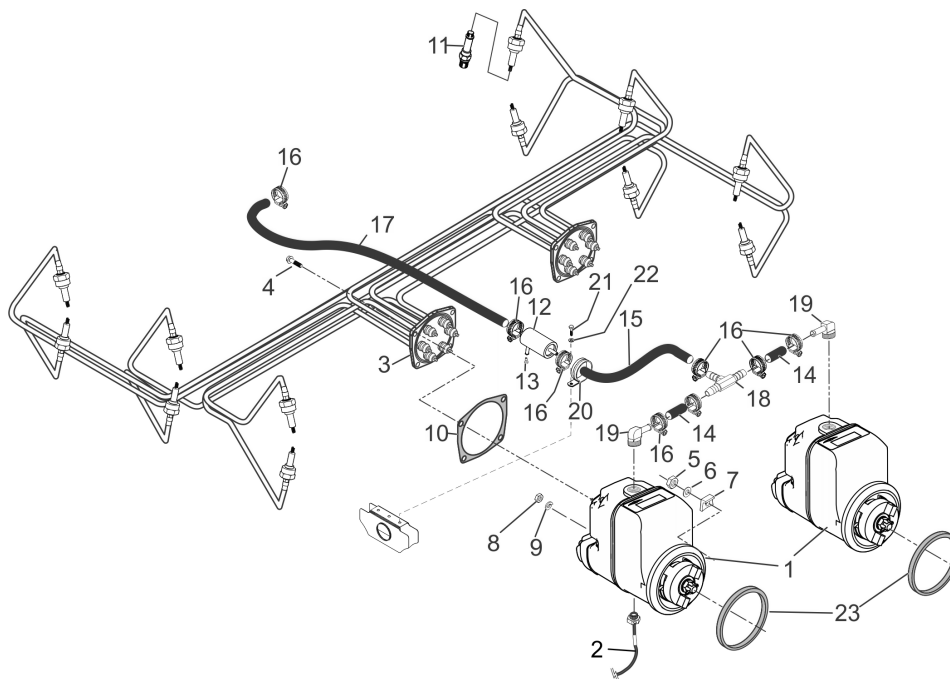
Pressurized Magneto with filter assembly (typical installation)
